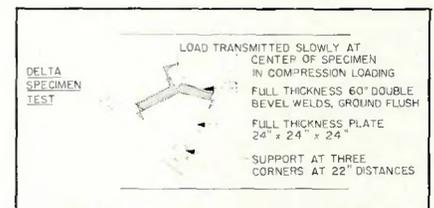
The Delta test procedure as conducted on welded plate. A 2-in. diam surface patch of Hardex-N at the center of the "down" side serves as a crack initiator. Both 1-in. plates
